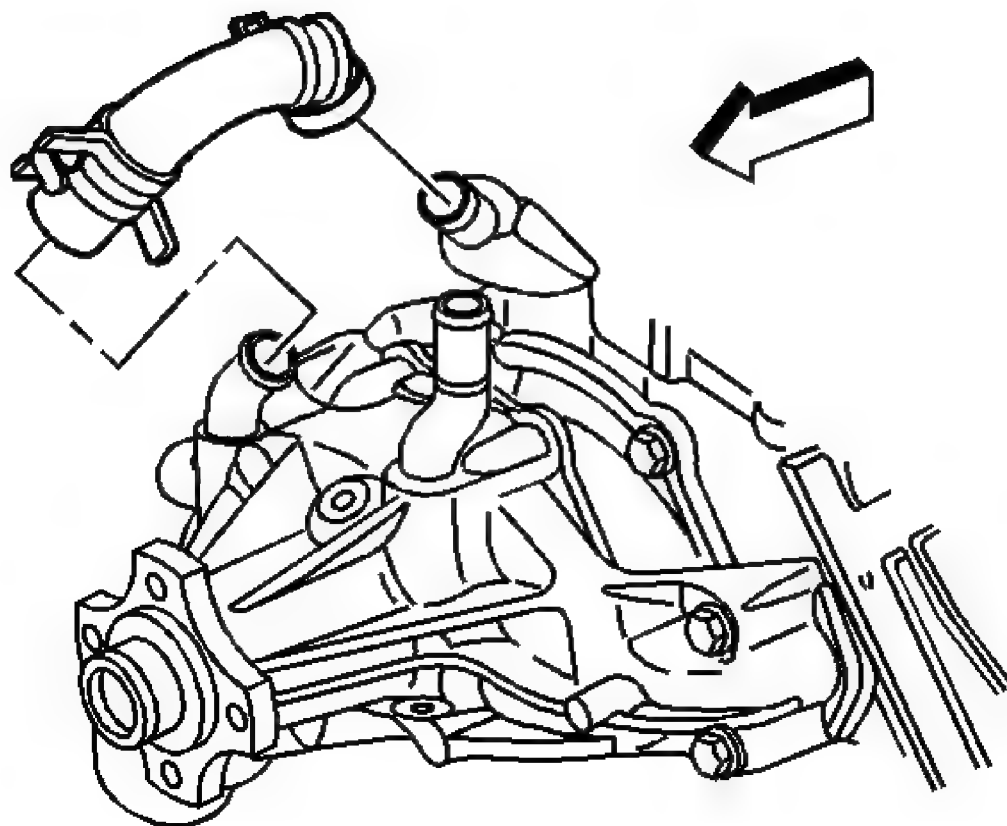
View Of Water Pump Inlet Hose & Clamps
